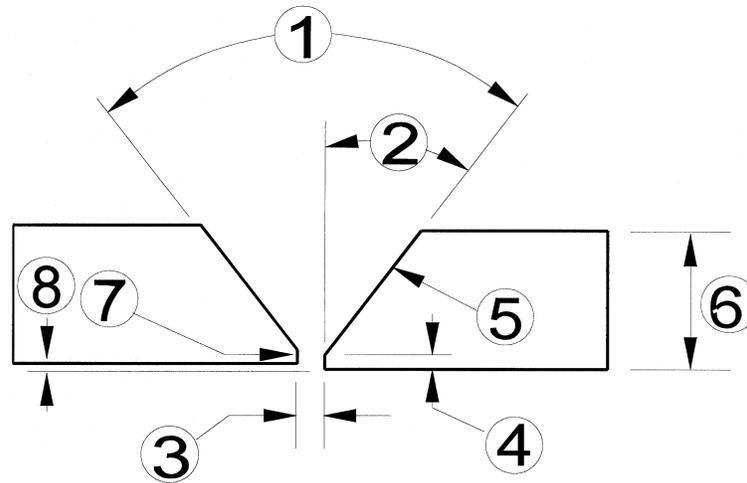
Weld Joint Design (numbers correspond to descriptions in the Joint Preparation Section)
